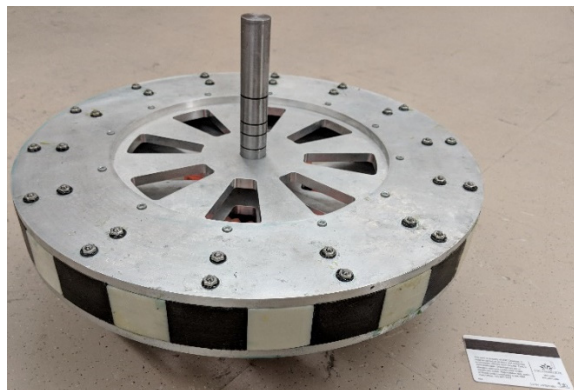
Assembled inner rotor of stage 2 MG.
